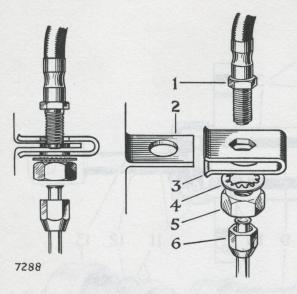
Flexible hose connection. In some instances the locating plate (3) is omitted.
